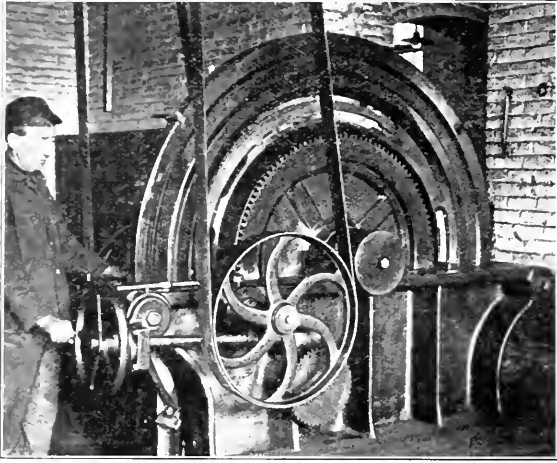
FLEXIBLE-BEND MILLING MACHINE
